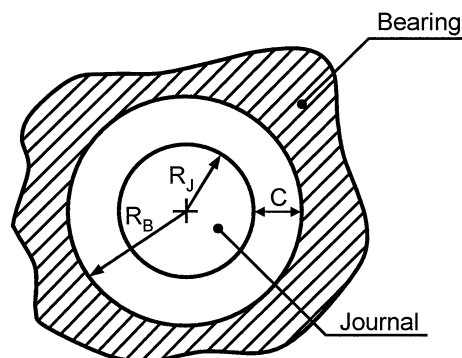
Revolute joint with clearance, that is, the so-called journal-bearing.
